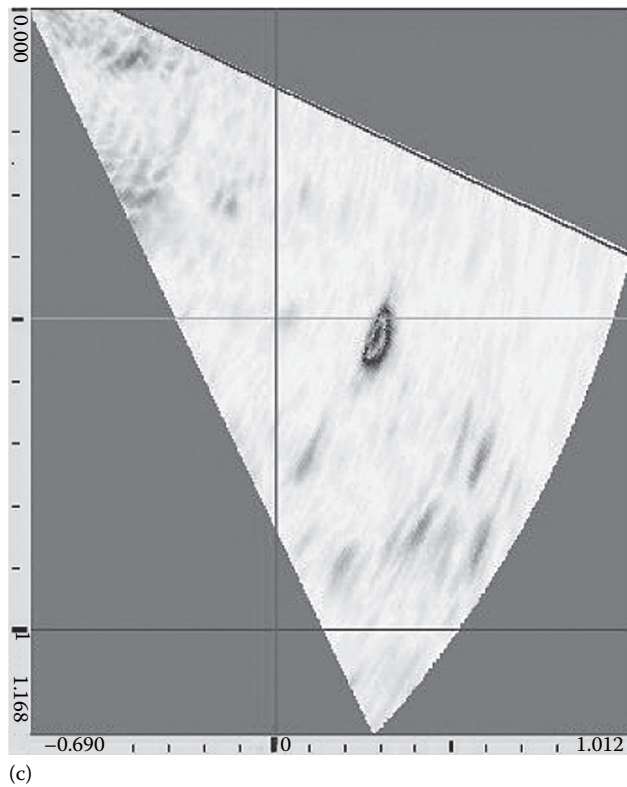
(continued) Phased array technique. (c) example of defect image detected in welds. (Courtesy of Anmol Birring, Houston, TX.)
